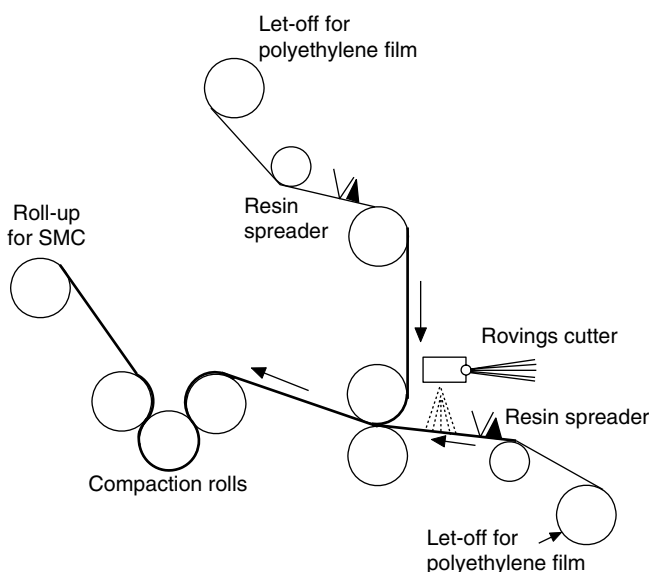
Schematic outline of machine used for sheet-molding compounds.
